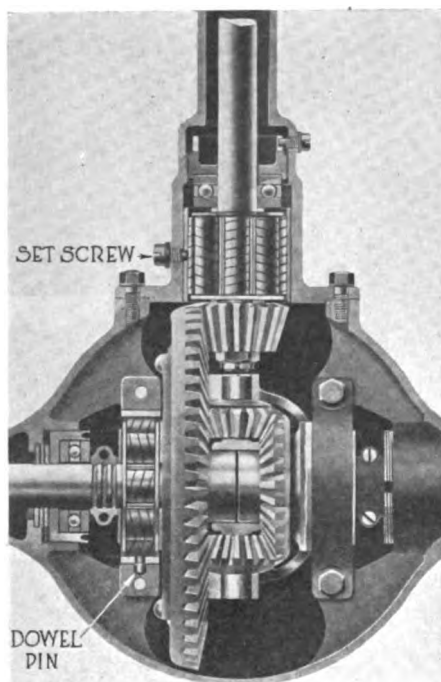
Section through axle, showing use of dowel pin and set screw for holding roller bearings in position
